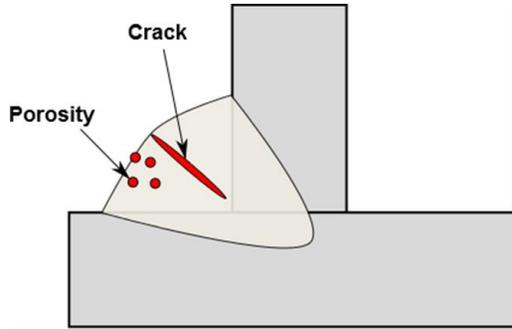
Illustration of the solidification cracks and porosity in the fillet welds.
